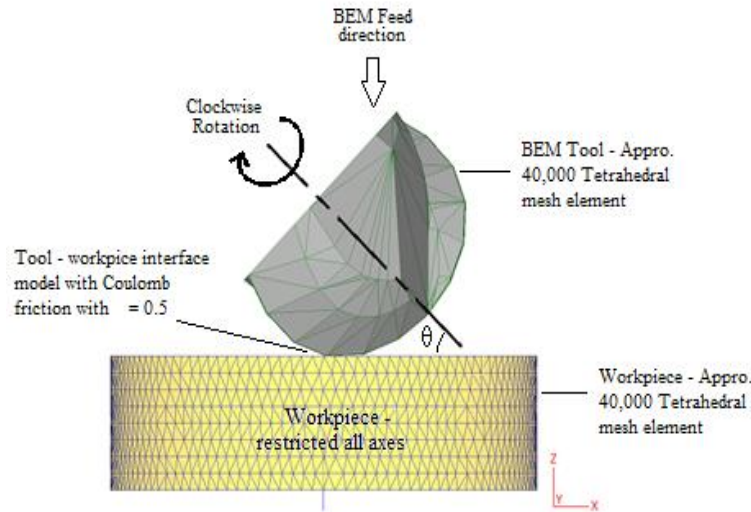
BEM tool and workpiece orientation and parts of pre-processing setup applied to the simulation.
